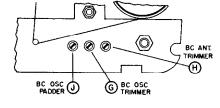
Front View of Chassis Showing Location of Alignment Adjustments
